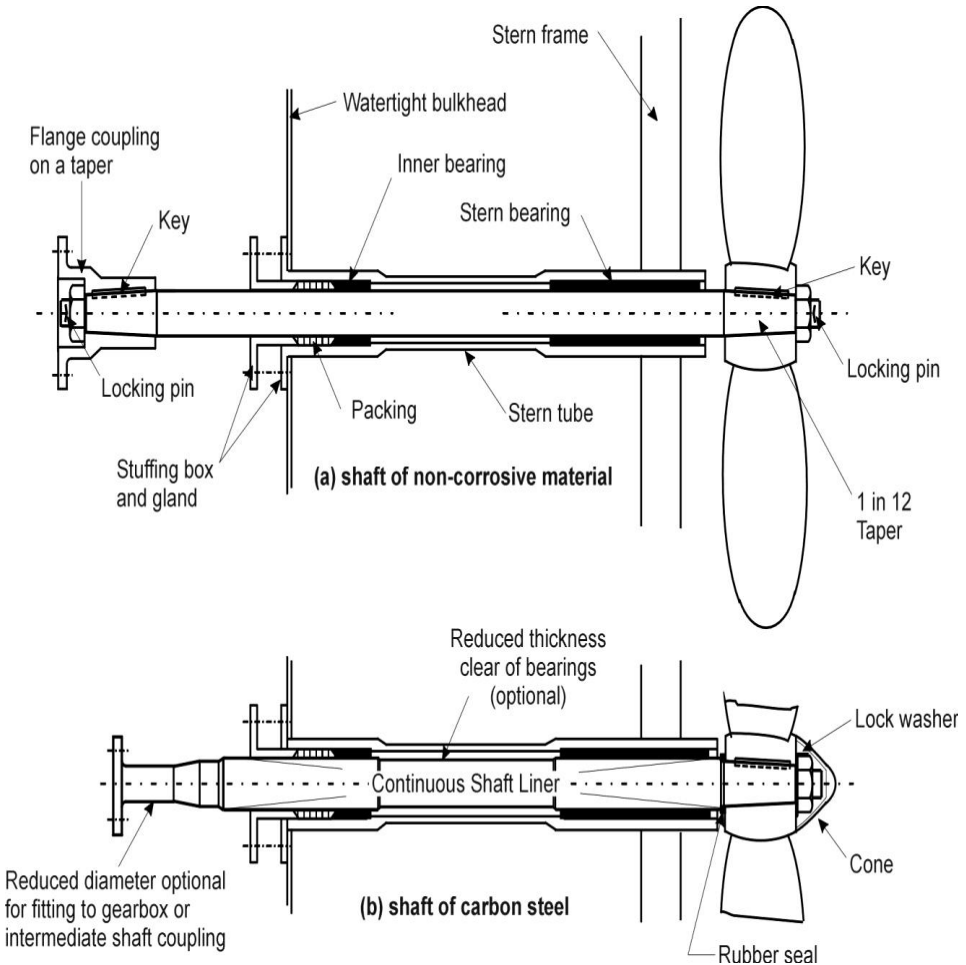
Typical propeller shaft, stern tube, stern bearing and gland
